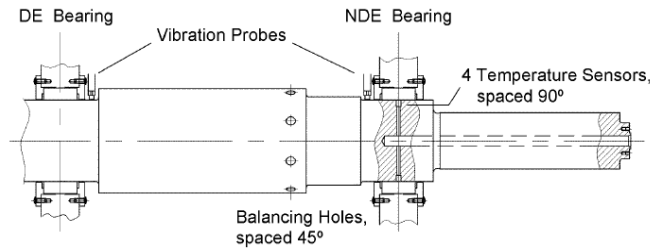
Test Rotor with Four Temperature Sensors at the NDE Bearing.
